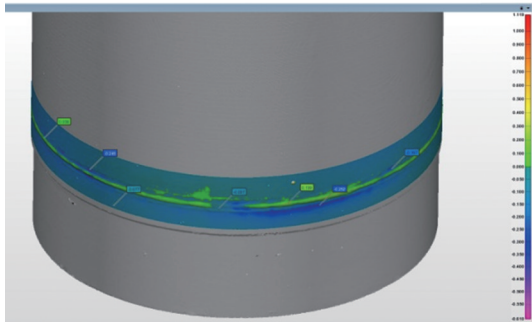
Morphology of laser-arc hybrid welding joint of a 5 mm simulation workpiece
